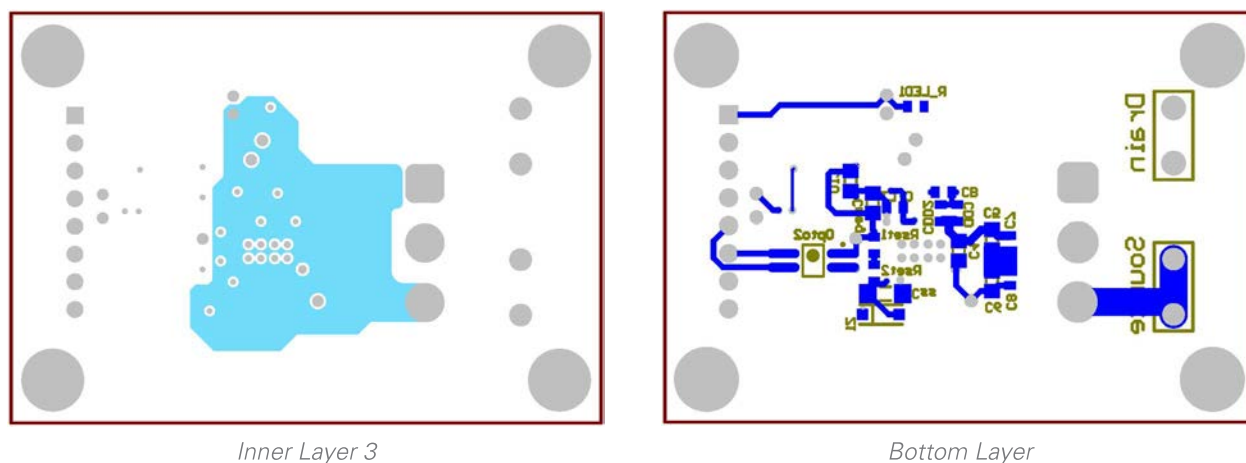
Evaluation Board, Inner Layer 3 & Bottom Layer
